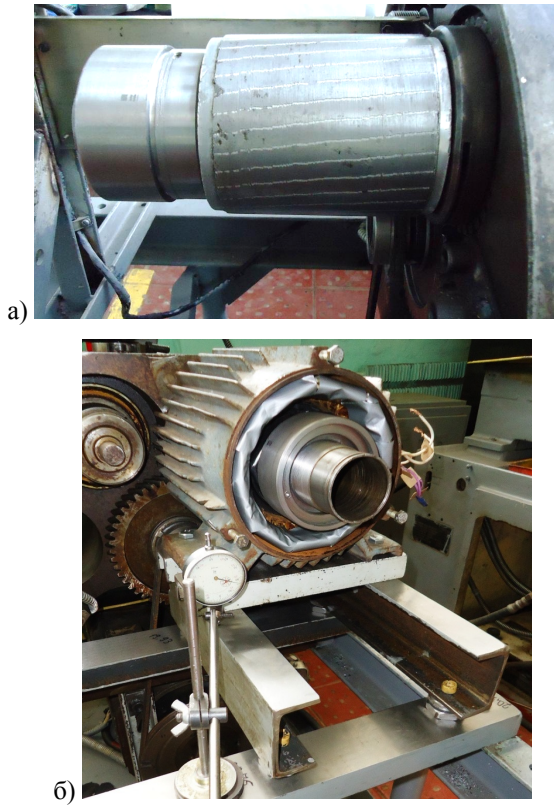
The electromechanical ACM: a) rotational part (without stator); b) general appearance
